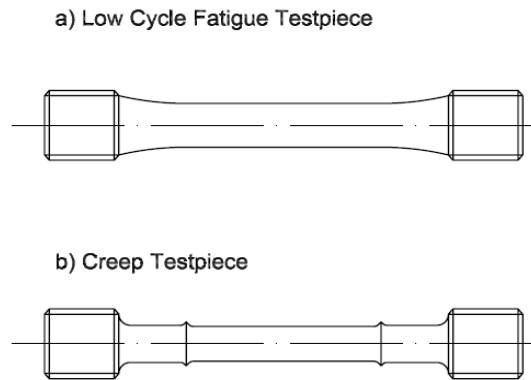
Testpiece geometries used for a) prior fatigue tests and b) subsequent creep tests, both at 565°C. b) is machined from a) after PCD
